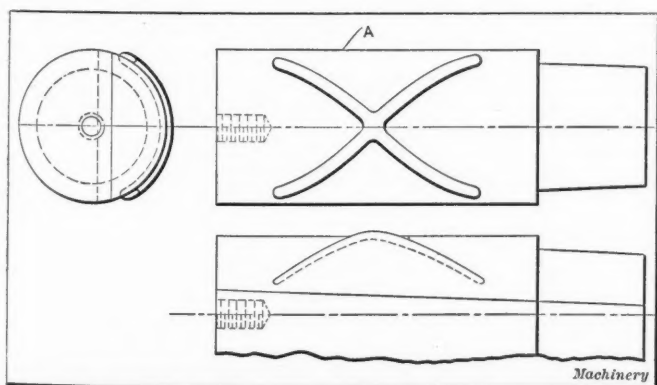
Mandrel for babbitting Bearings with Crossed Oil Grooves
